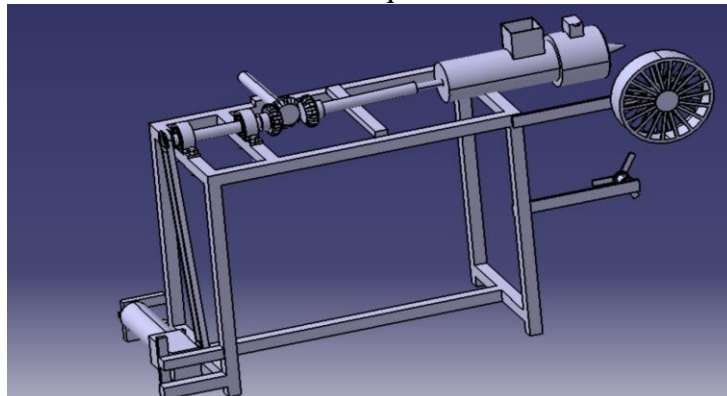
3D Printing Filament Extrude Machine Diagram
